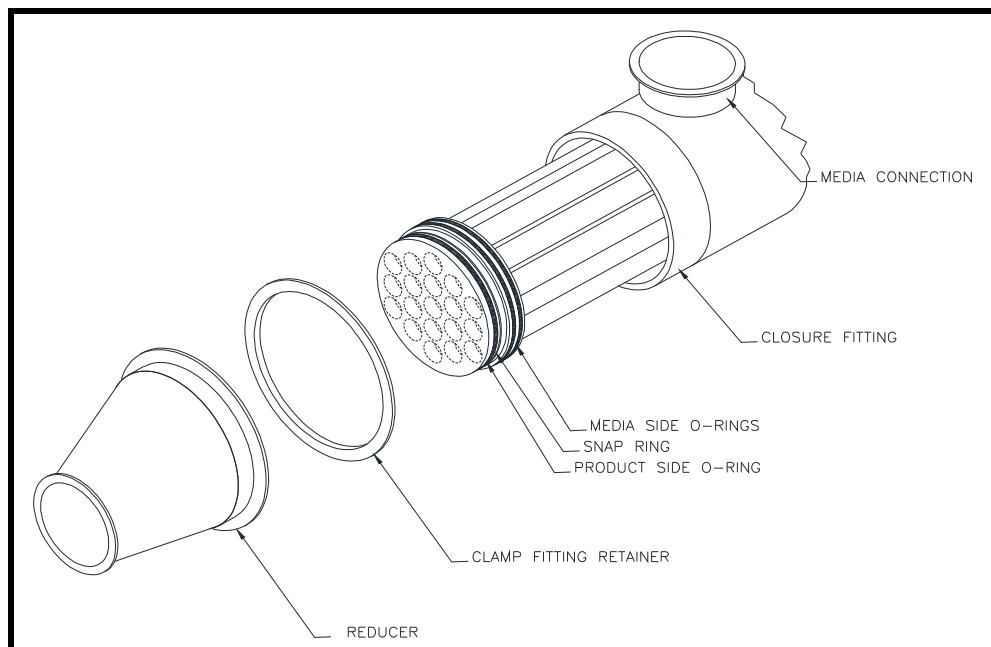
Exploded View of a Multi Tube Heat Exchanger
